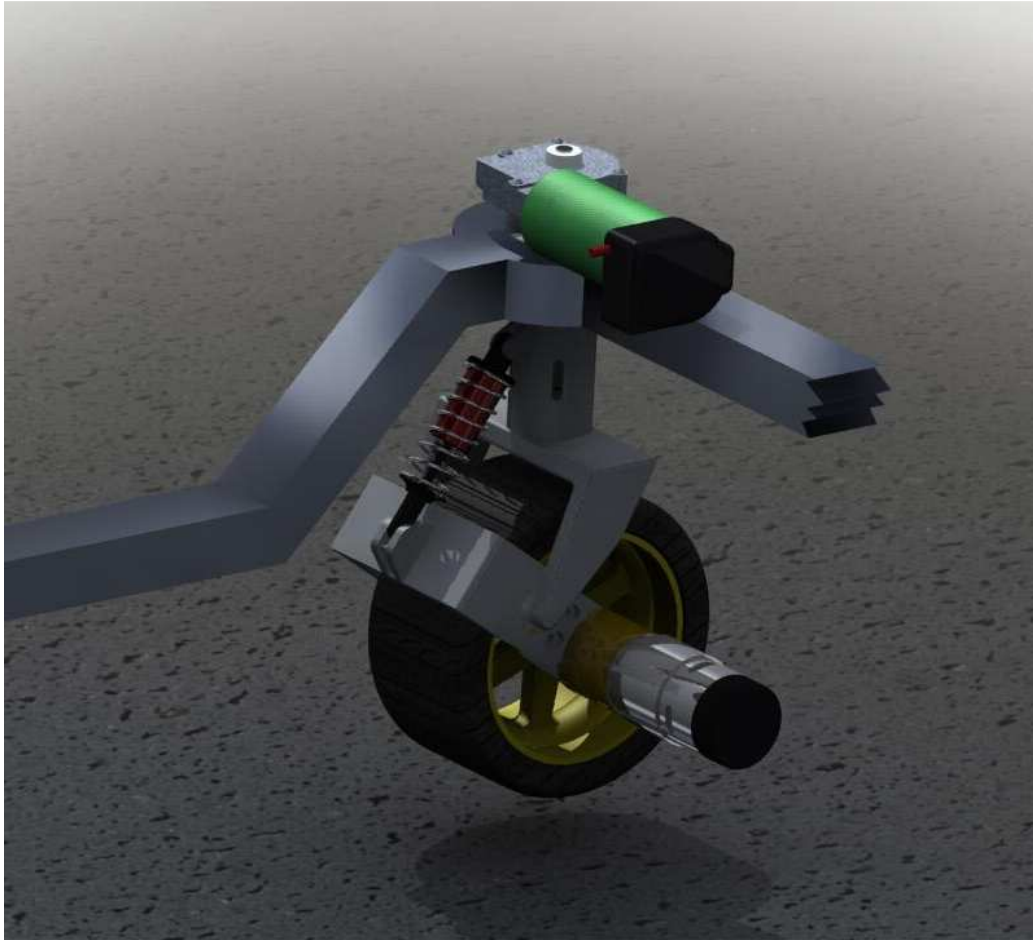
Wheel mount design inspired by baby-coach suspension, with engine connected directly to the wheel.
